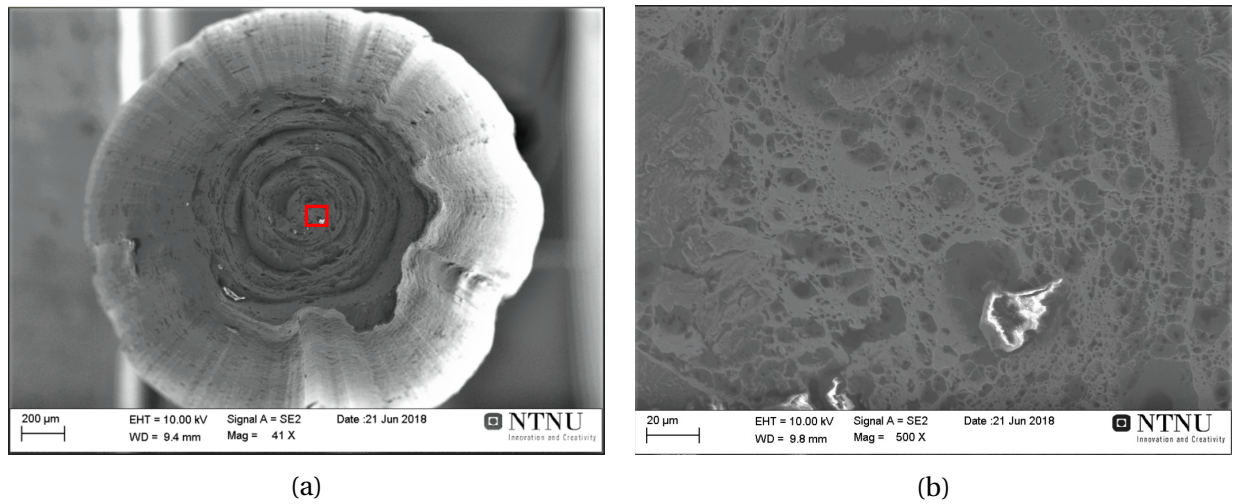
(a) Macroscopic SEM-image of fracture surface for tensile tested AlF3. (b) SEM-image of fracture centre at 200X magnification showing a large particle.
